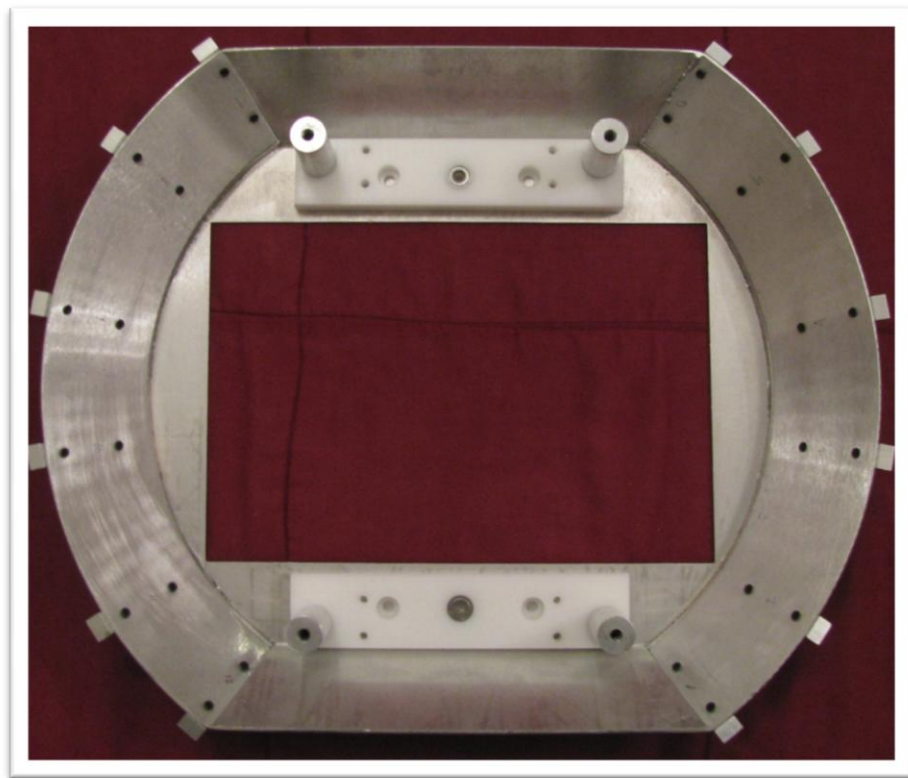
Both ball bearings mounted in Acetal plastic mounts
